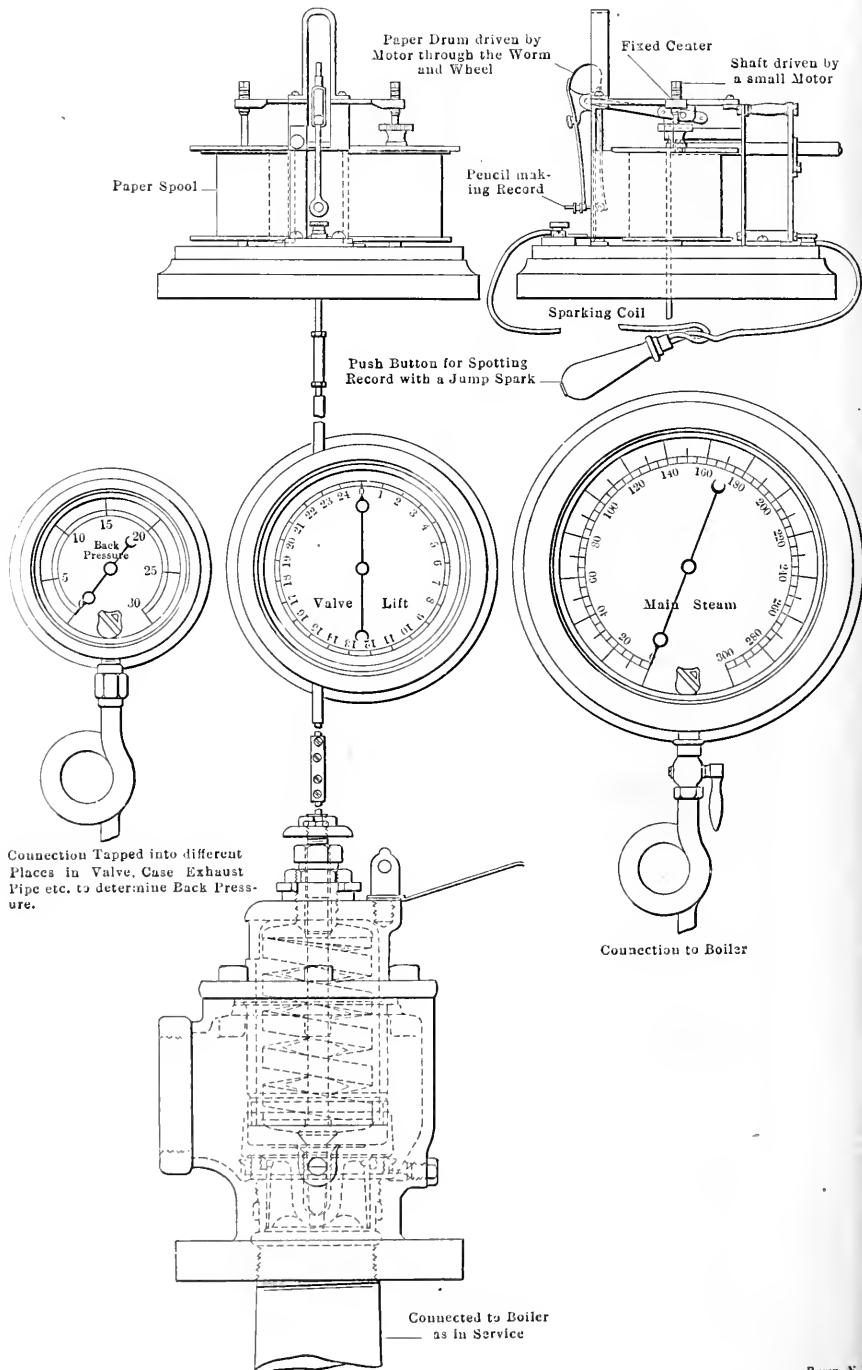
OUTLINE DRAWING OF THE SAFETY-VALVE TESTING APPARATUS
